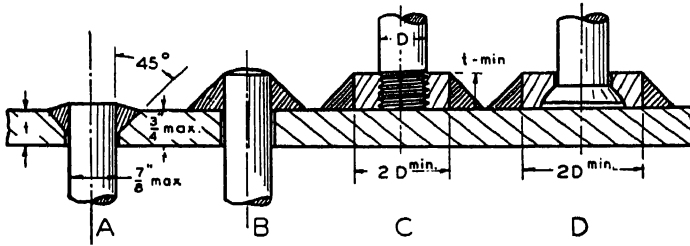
Welded Staybolts and Proportions.
